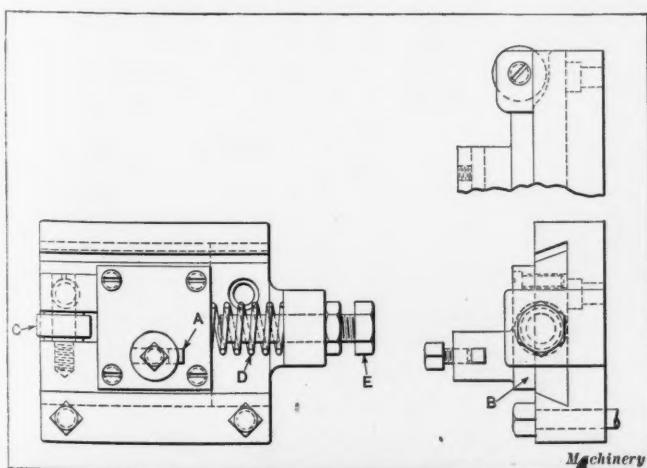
Recessing Tool that is used for cutting Clearance for Thread Milling Cutter
